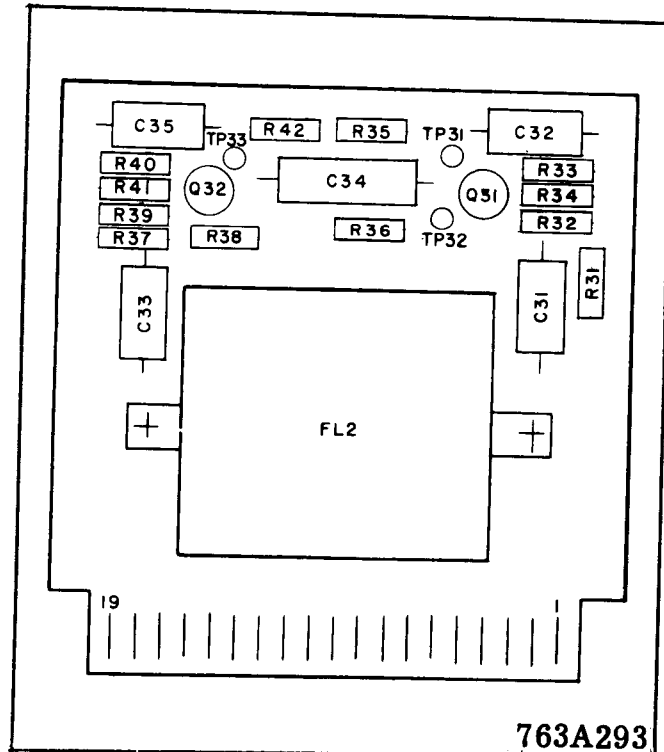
Component Locations on I-F Amplifier Printed Circuit Board.
